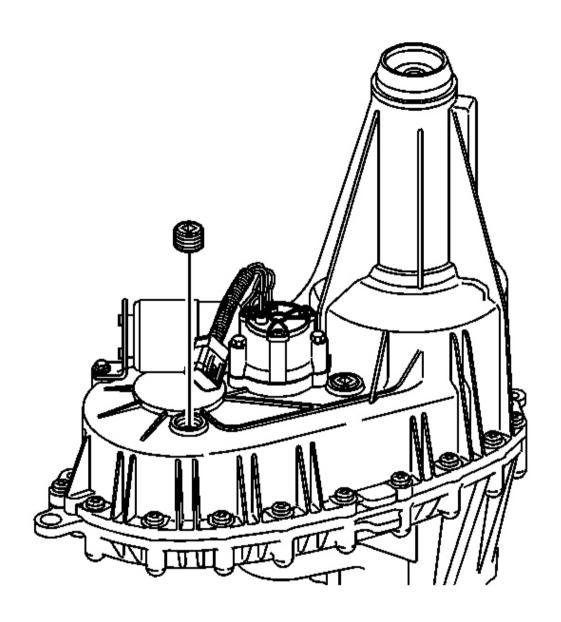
Drain Plug & Fill Plug Courtesy of GENERAL MOTORS CORP.
